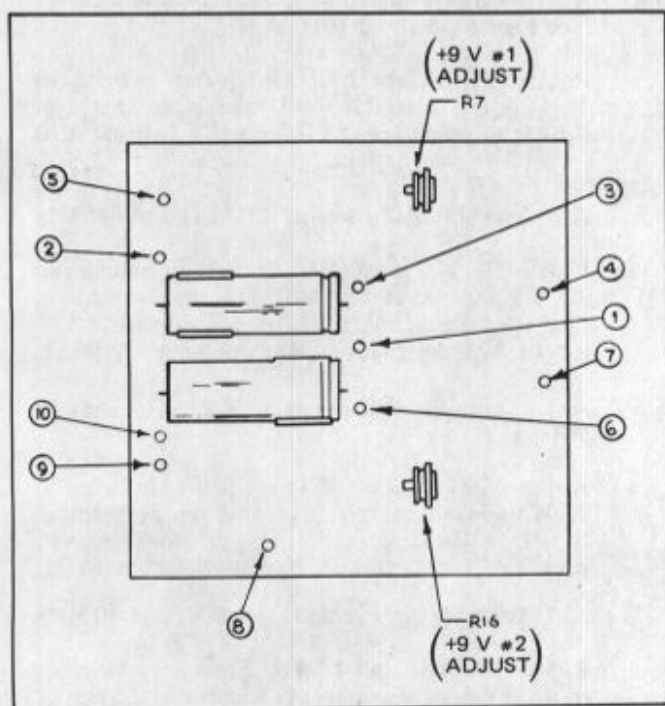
Trimmer Locations, Power Supply Assembly, A1A3
